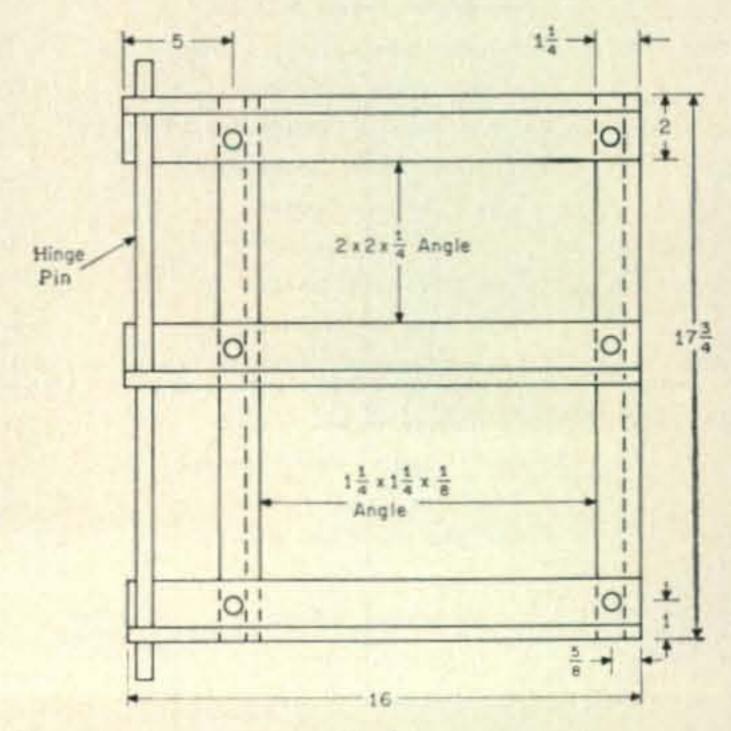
Hinge framework dimensions. All parts are galvanized or painted with rust resistant enamel.
